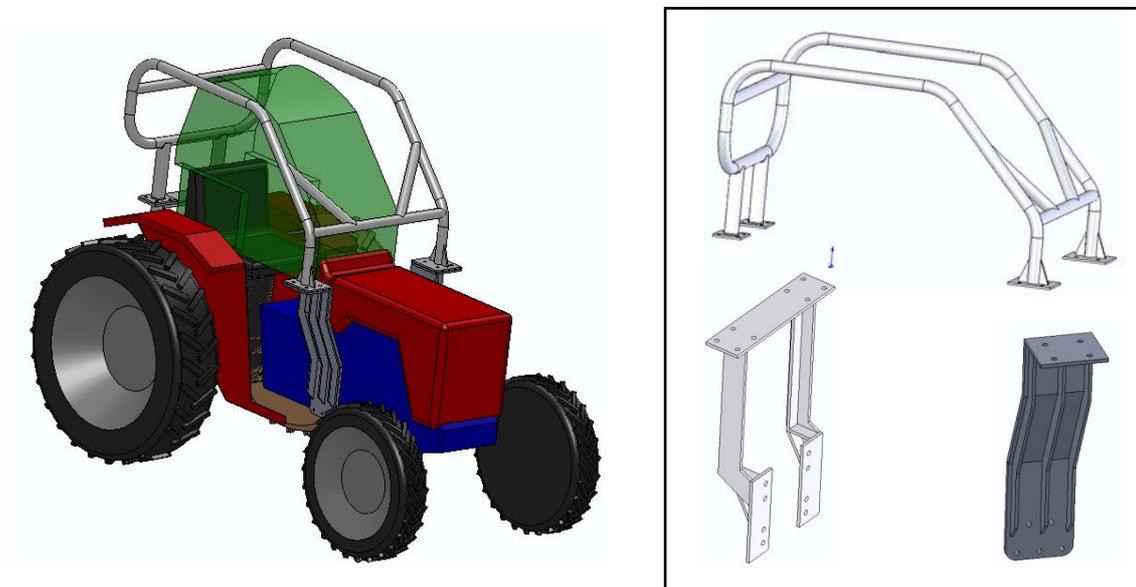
Tractor reverse engineering and CAD model of the CROPS
